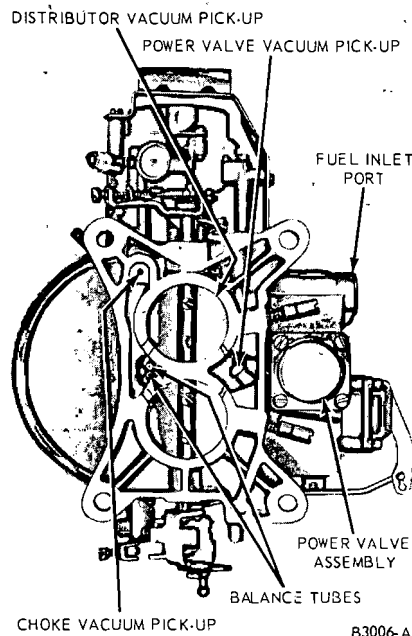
Autolite Model 2100 2-V Carburetor—Bottom View
